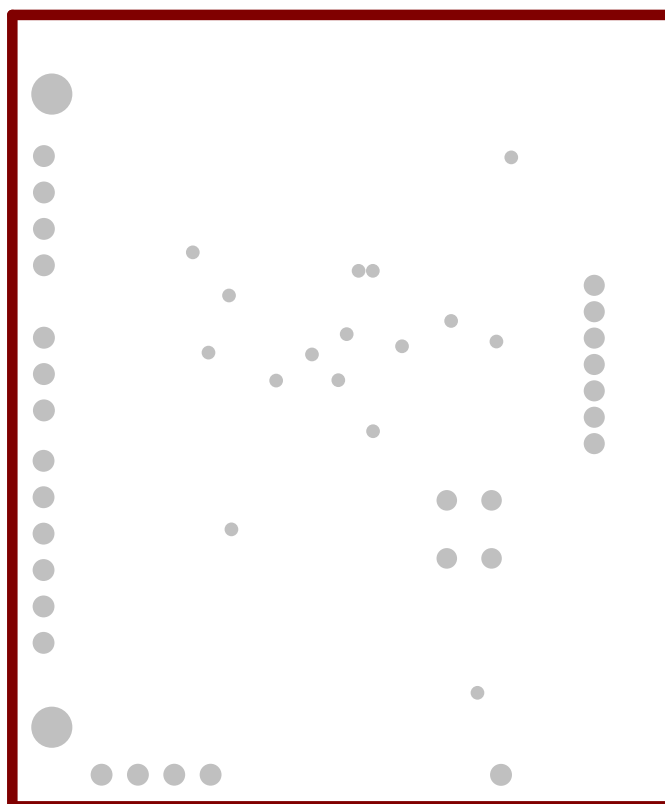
ADS124S18EVM PCB Layout - internal Ground (GND) layer 2
